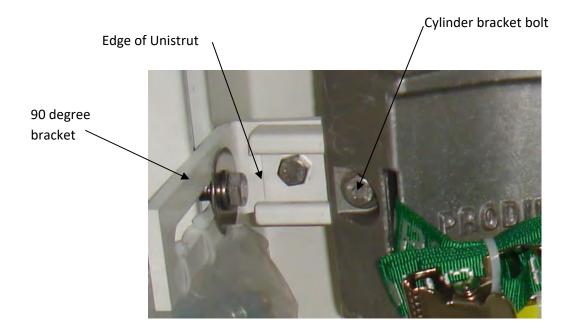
Detailed view of left side cylinder bracket assembly
